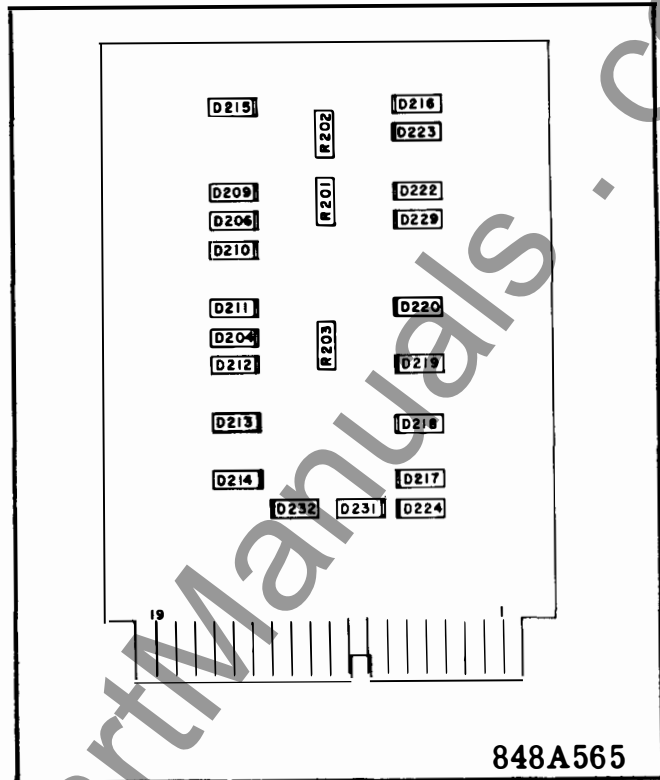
Component Location on AND Printed Circuit Board for Type SKBU Relay.
